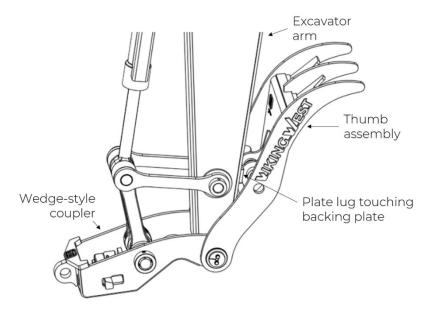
Positioning the backing plate before welding it to the excavator arm.
